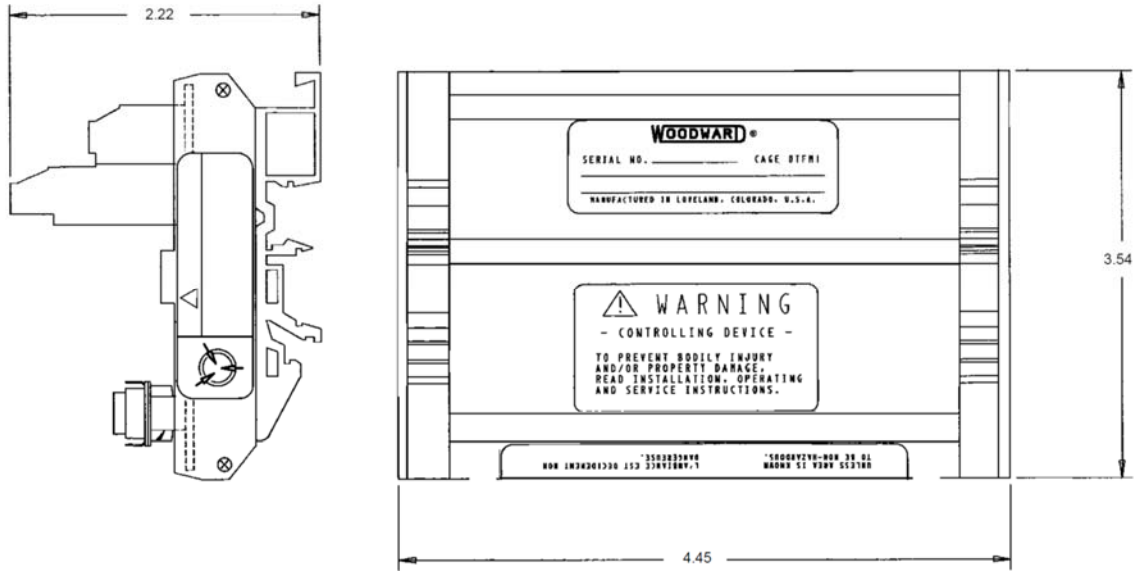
Four Channel Actuator Driver FTM Outline Dimensions
